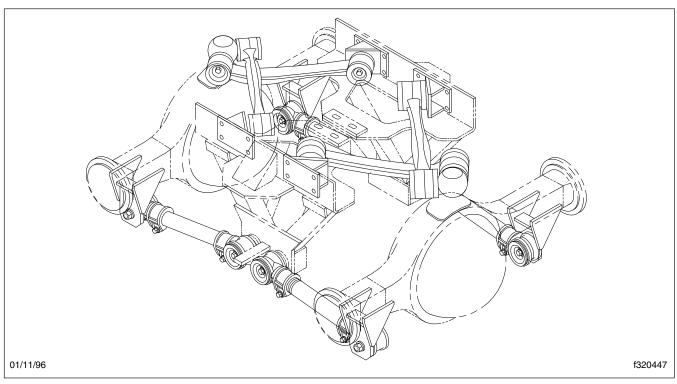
, Torque Rod Arrangement, 46,000- and 52,000-Pound Capacity Suspensions
